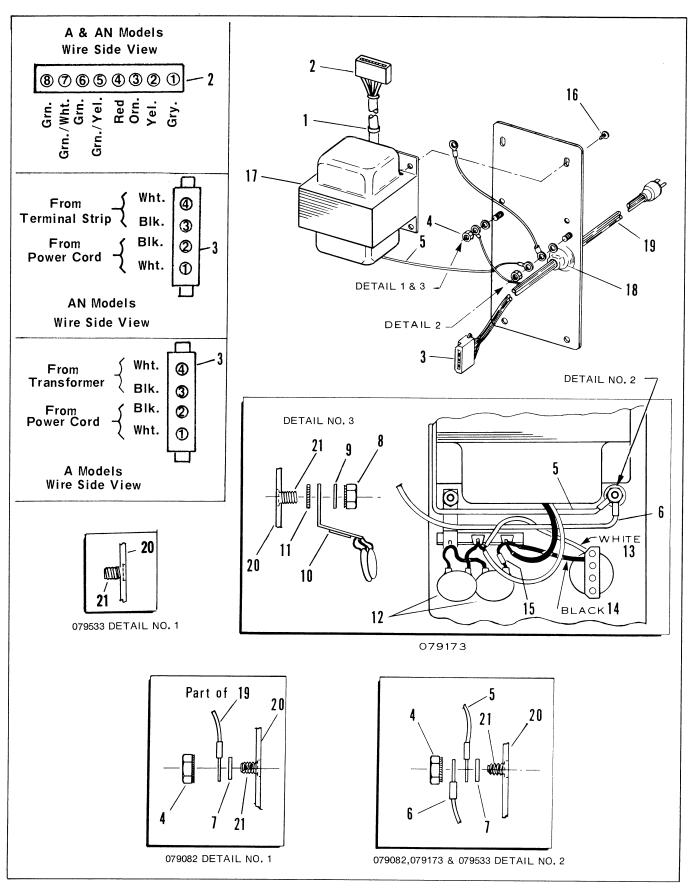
Transformer and Wiring Plate Assembly ("A" and "AN" Models Only)
